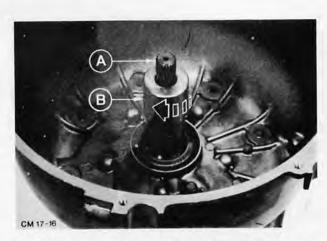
Centring of converter housing/pump using Special Tool 17-009-01
